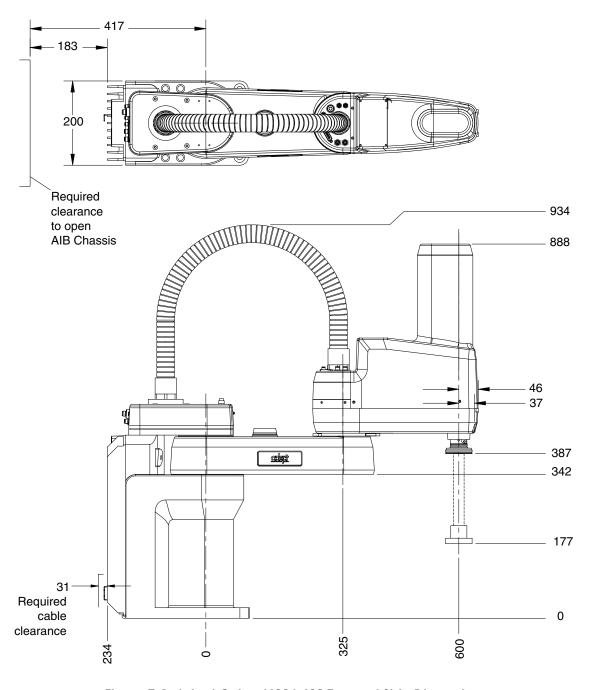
Adept Cobra i600/s600 Top and Side Dimensions
